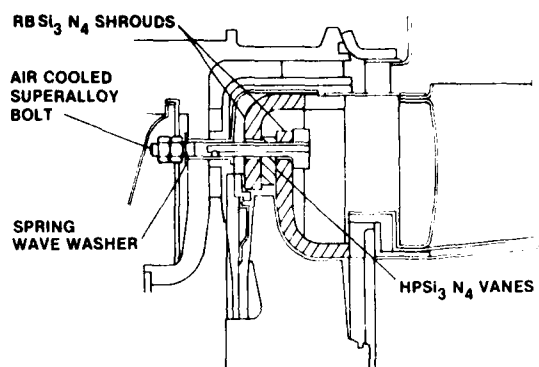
All-Ceramic Nozzle Design Concept No. 1, RBSi₃N₄ Shrouds, HPSi₃N₄ Vanes and Cooled 718 Bolts
